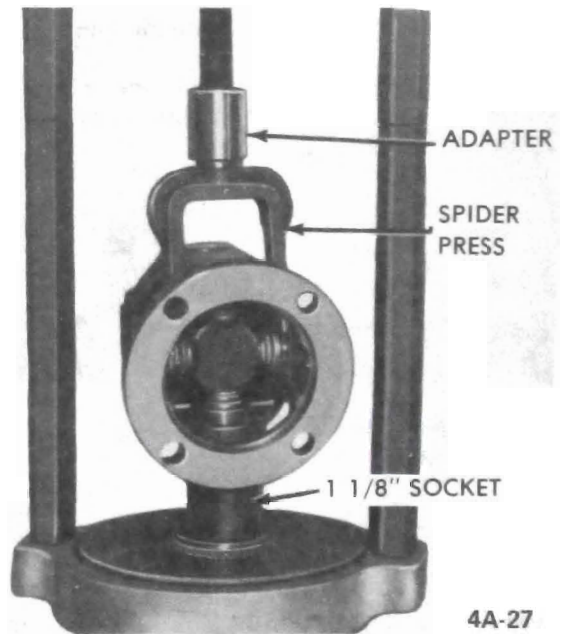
A-27 Disassembling Rear Double Cardan U-Joint
